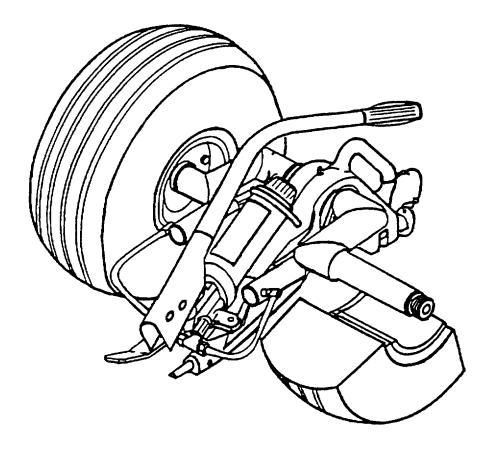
Ground Handling Wheels Assembly (Model 1730-EG-100)
